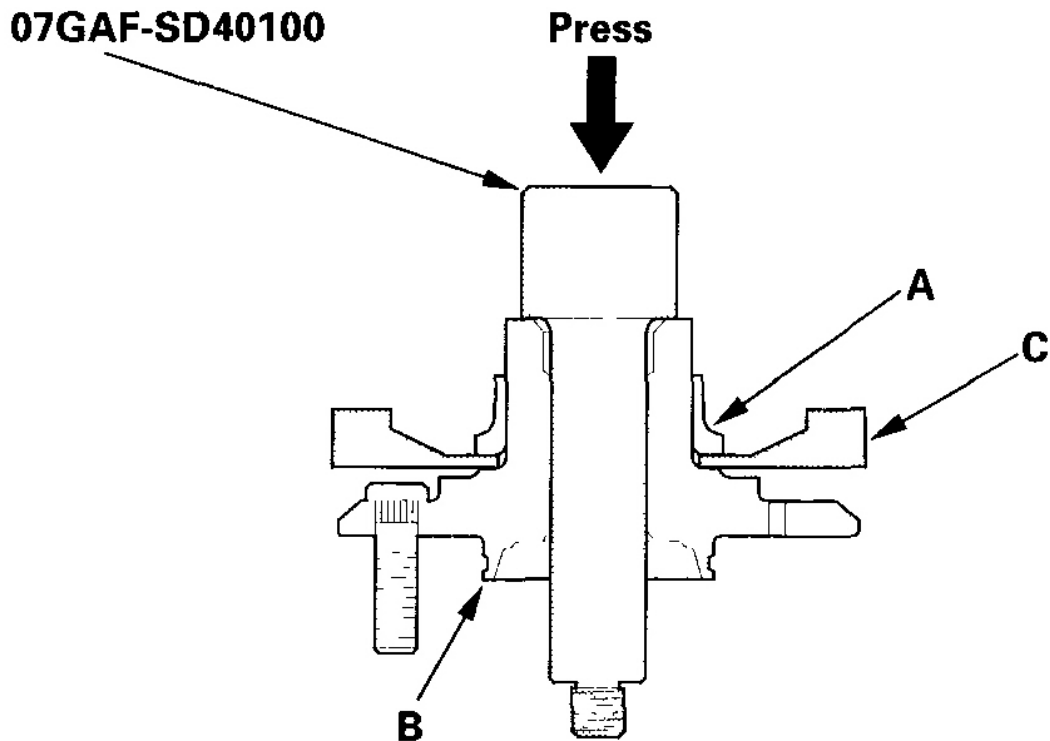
Pressing Wheel Bearing Out Of Knuckle
